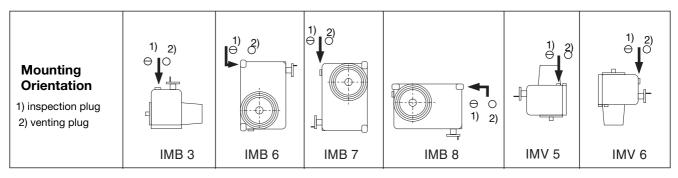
Mounting position RHD250 ... RHD2500; <sup>1)</sup> = inspection screw, <sup>2)</sup> = venting screw
